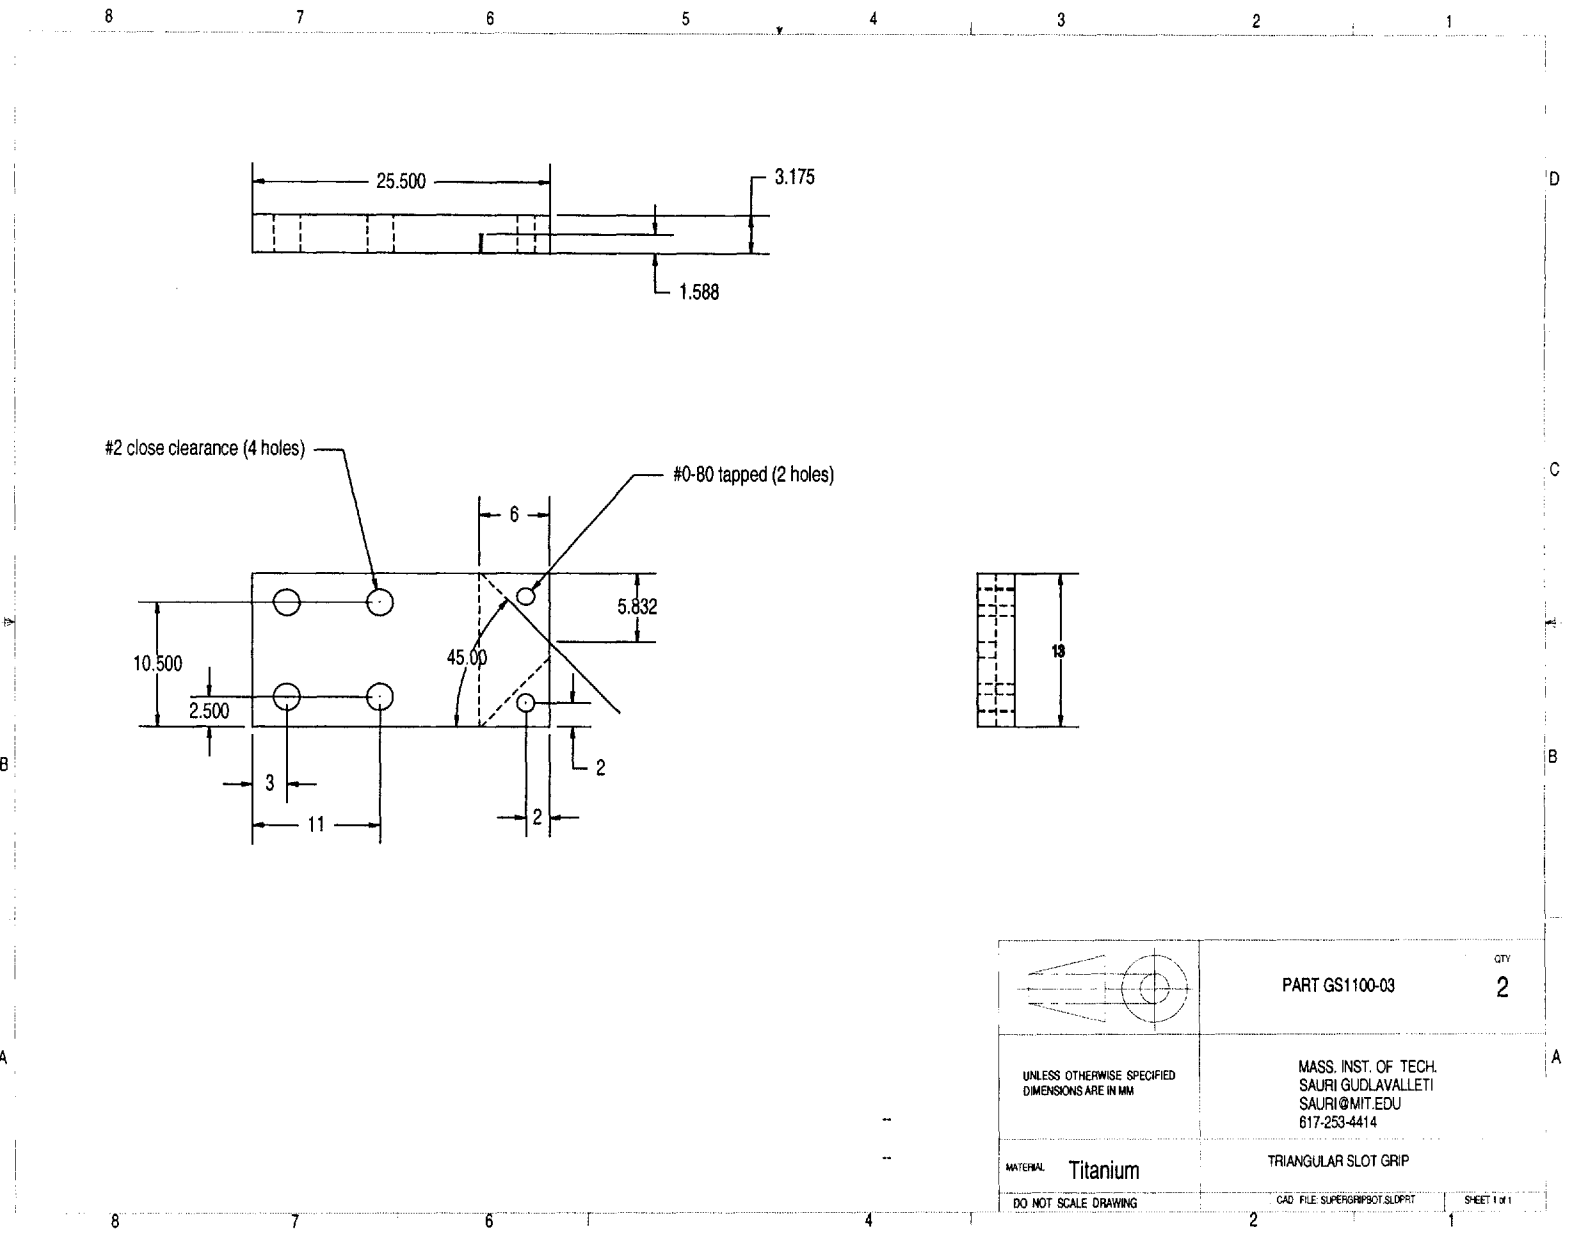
Part GS 1100-03. Grip for bowtie shaped tension specimen. These grips need to be used in association with Part. GS1100-01 or GS0601-01. Ref. Fig. 4-4 for an assembly drawing.
